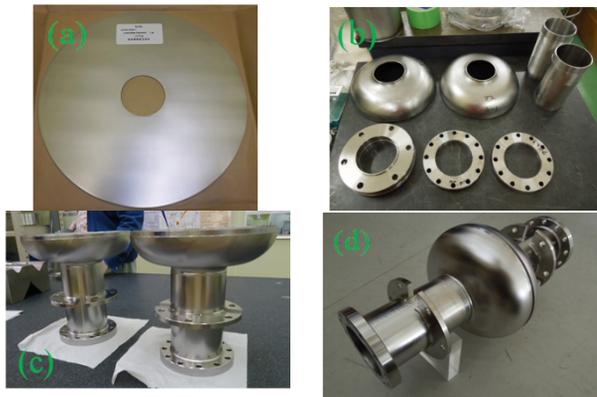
(a) Fine grain Nb disk, (b) cavity components before welding, (c) end groups and (d) completed cavity.
